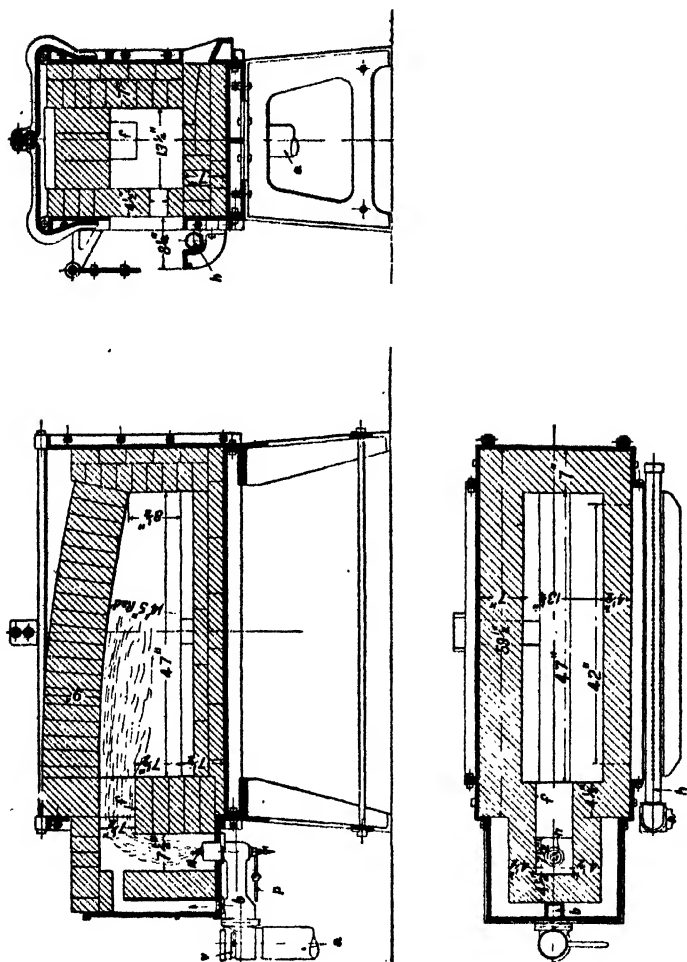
Sectional elevations and plan of Ferguson oil-fired forging furnace.
